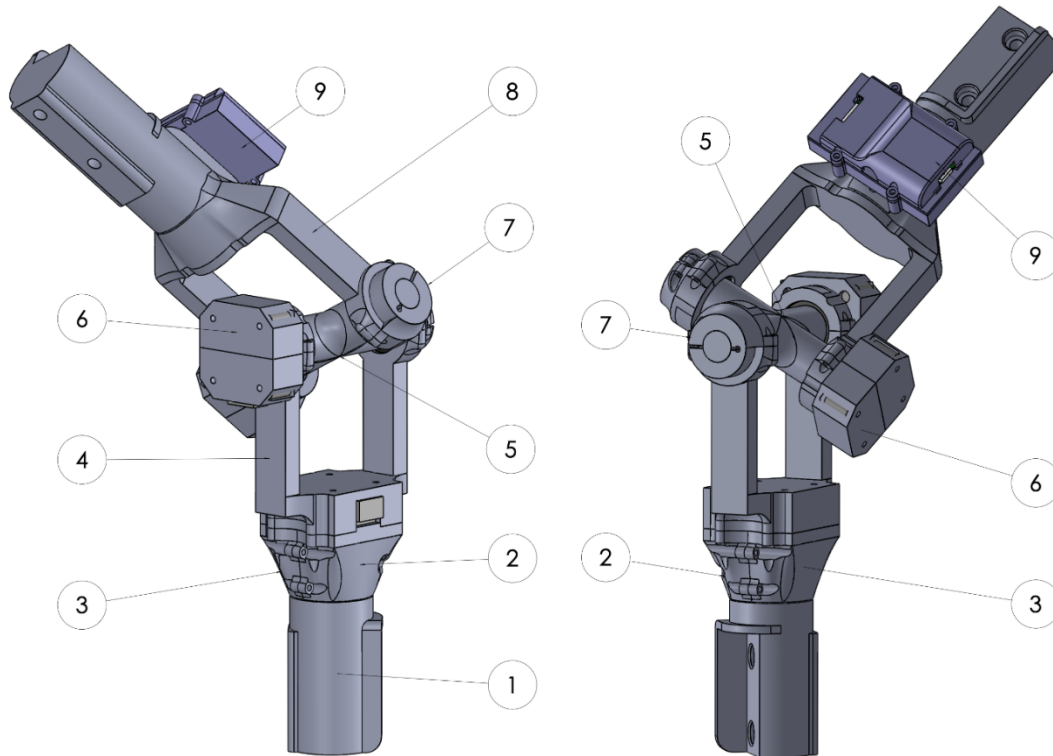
Front view of our prototype joint design (left) and back view of our prototype joint design (right)
